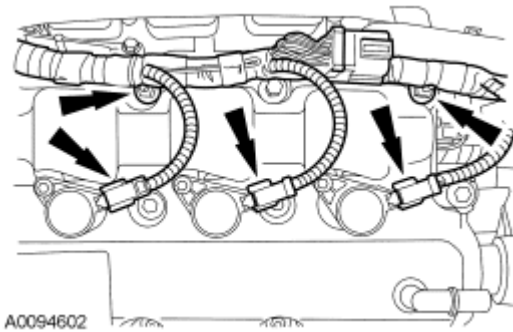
Locating Ignition Coil Electrical Connectors & Wiring Retainers
